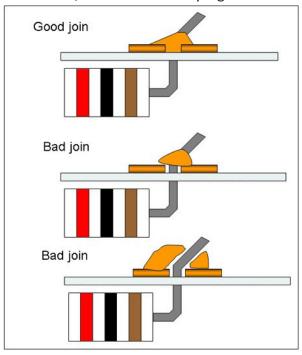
The solder in a good join will be shaped like a cone, with solid contact between the solder and all surfaces to be joined. Bad joins (also called dry joins) should be melted and remade.
